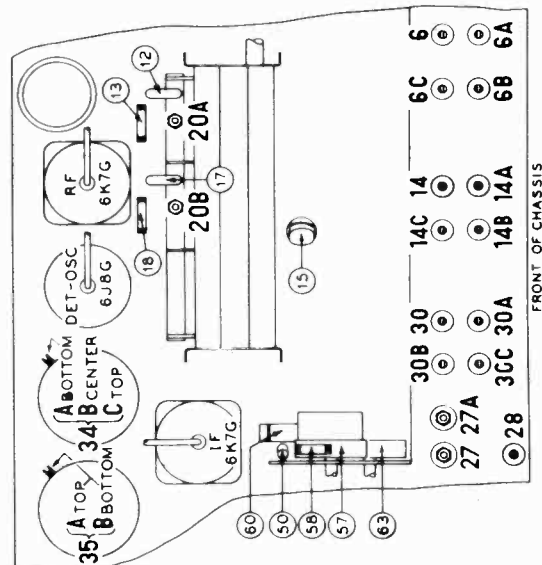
Compensator Locations: Top, Front View of Chassis.
